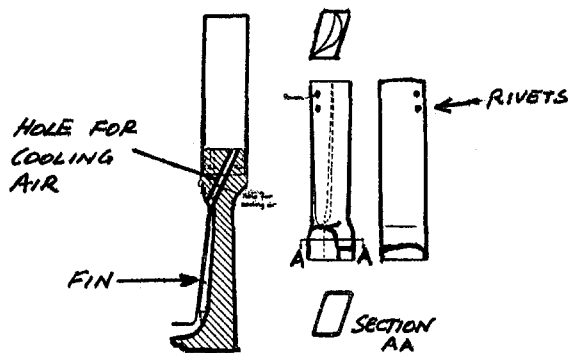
Hollow air-cooled turbine blade. The disks for the hollow blade had a thin sheet across the front face flared out near the center. This picked up cooling air and whirled it toward the disk roots, where it entered two small holes drilled in the disk rim and then flowed up through the blade. Later production models had two small rivets at the blade trailing edge near the tips, which were needed to avoid a vibration cracking problem (Shepherd, 1949).
